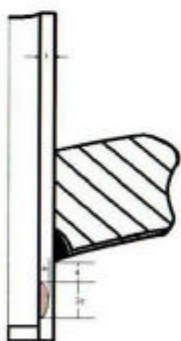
Inside, Axial Surface Flaws, .5" Below the Attachment Weld, Nozzle Uphill Side - Crack Growth Predictions
